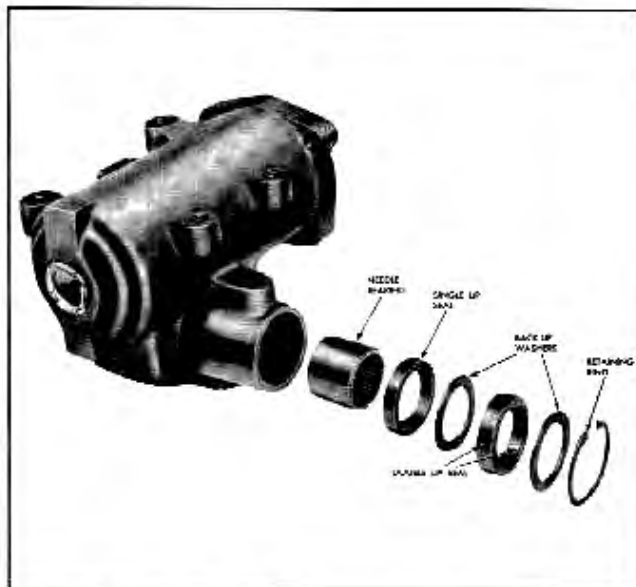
Pitman Shaft Gear Oil Seals and Needle Bearing—Exploded View
